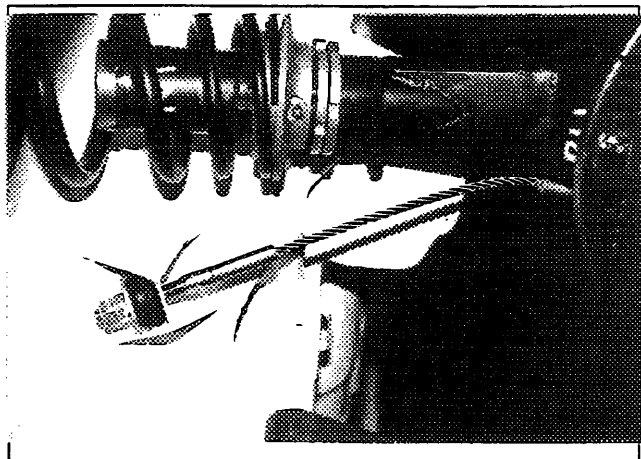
FRONT REINFORCED TOP MOUNTING PLATES
